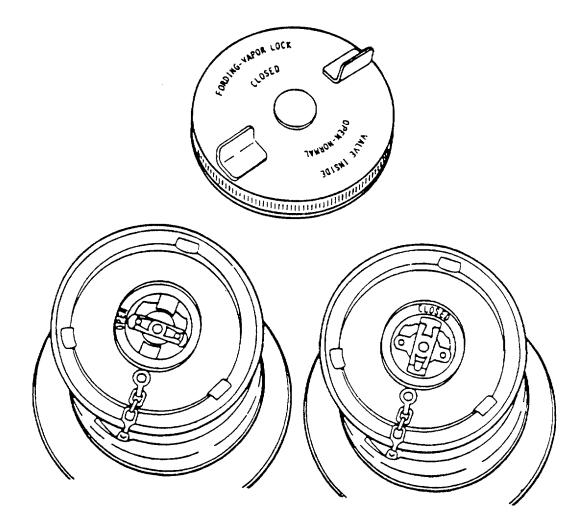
Fuel Tank Filler Cap and Vent Valve Selector.
